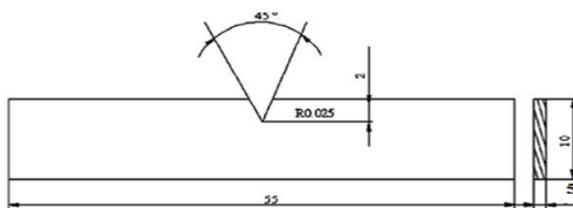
(b) Charpy Impact specimen ASTM A370 standards.
